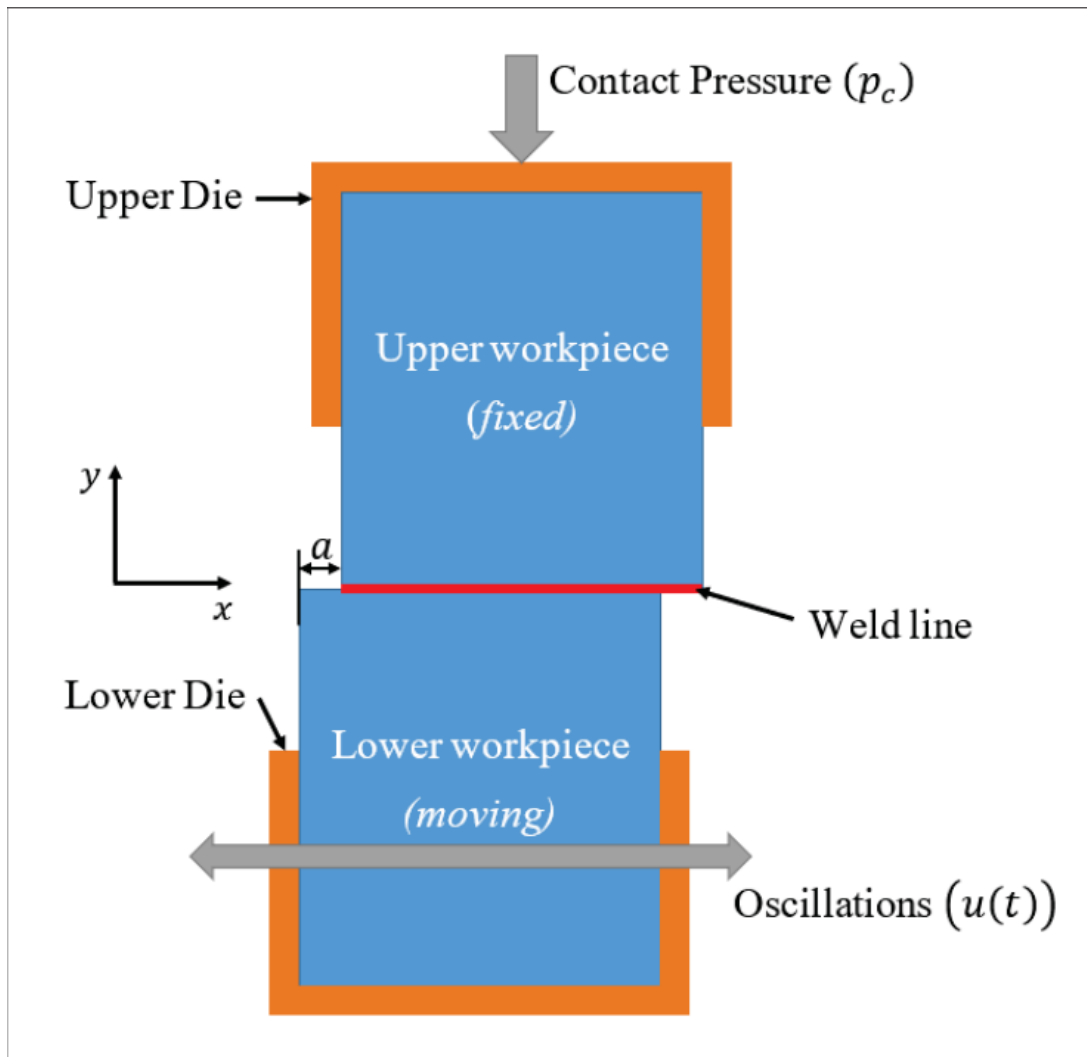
2D Linear friction welding diagram, showing typical process parameters.
